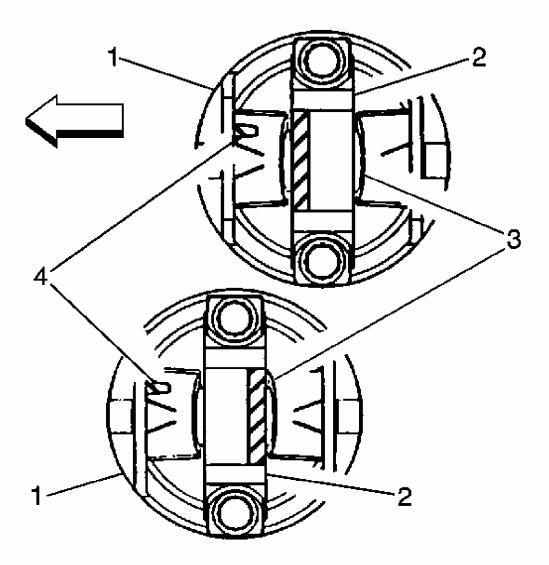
Identifying Piston & Connecting Rod Locating Marks Courtesy of GENERAL MOTORS CORP.
